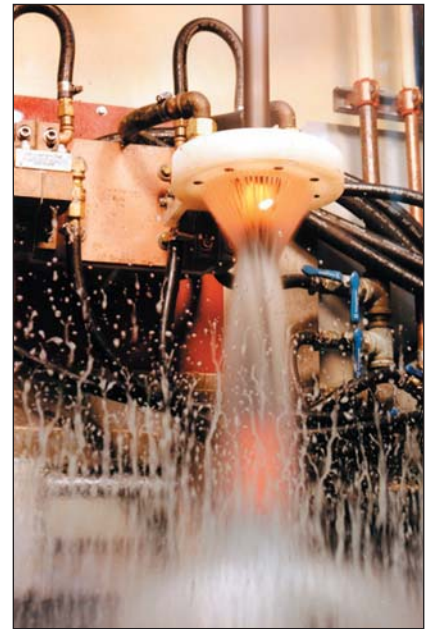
When induction hardening cylindrically shaped parts, spray quenching ensures uniform cooling.
